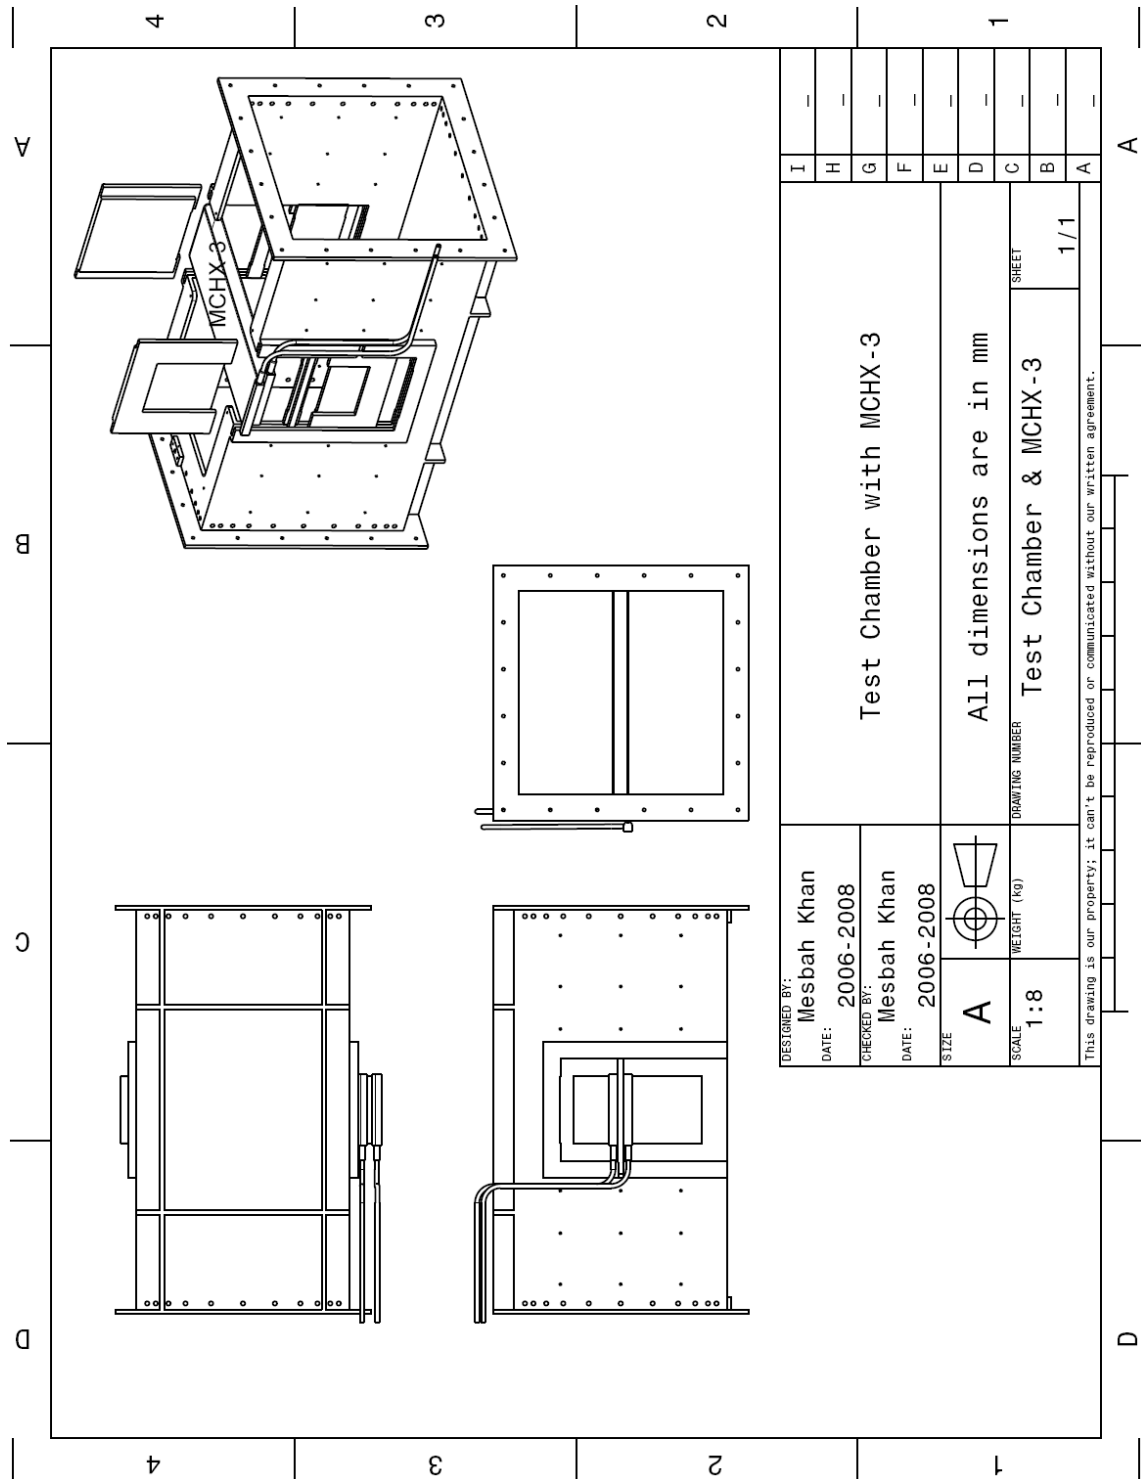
Design of test chamber support structures for test specimens MCHX-3
